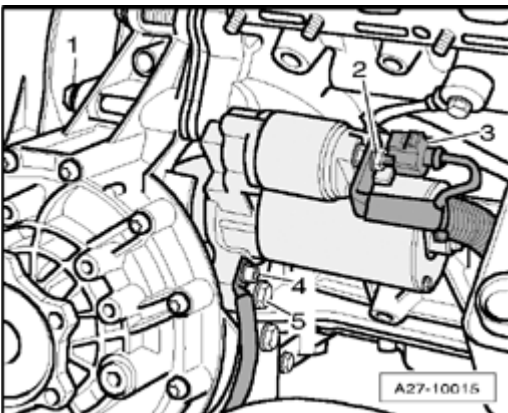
Identifying Ground Wire, Electrical Wires, Bolts, And Starter
